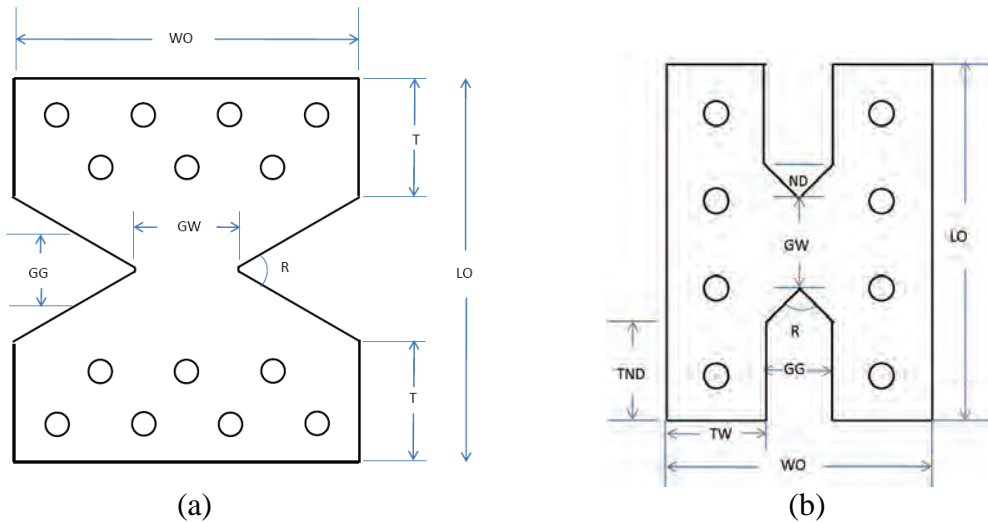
Bowtie specimens: (a) tension, (b) shear.
